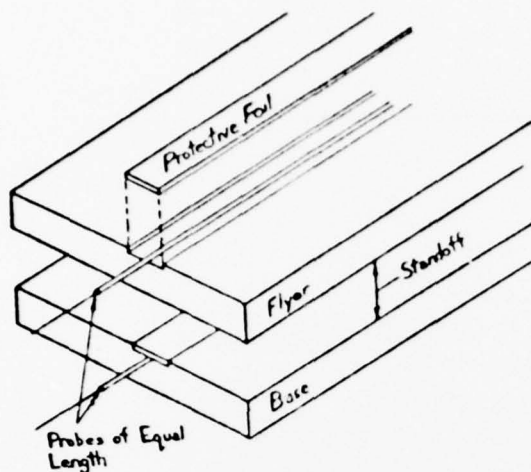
Arrange of Velocity Probes in Flyer and Base Plates of Explosion Welding Experiment.
